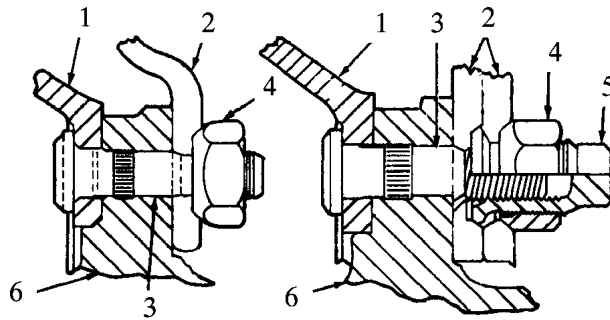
Inboard Mounted Drum Ball Seat (Conical) Nuts
